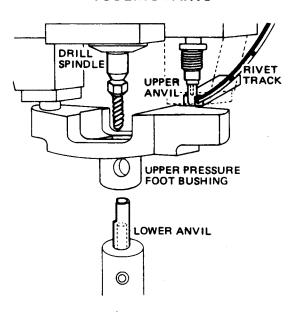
BASIC DRIVMATIC TOOLING COMPONENTS
